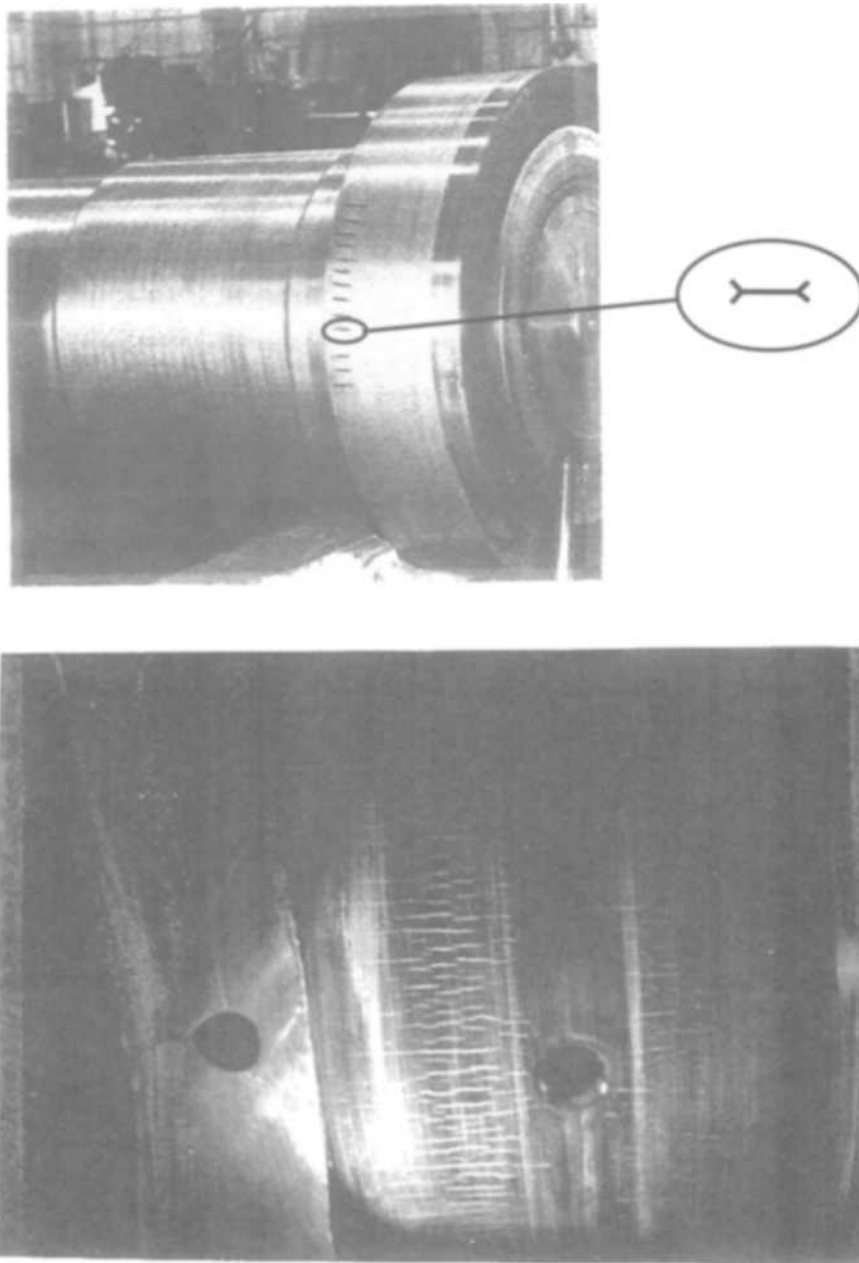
Sketch of a typical grinding crack pattern. The shallow parallel cracks are usually very short and oriented at right angles to the direction of the grinding wheel. When viewed under some magnification the cracks have forked ends making them potent stress concentration points for propagation by fatigue. The similarity of the cracking pattern on a crankshaft bearing surface as a result of bearing seizure (lower picture) is evident.
